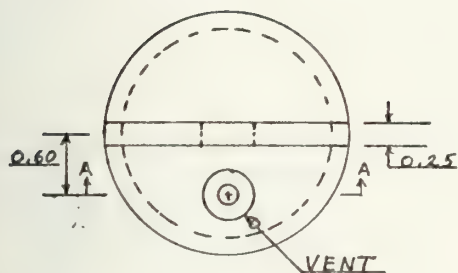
ASSEMBLY OF LIFTING BEARING AND BLOCK
